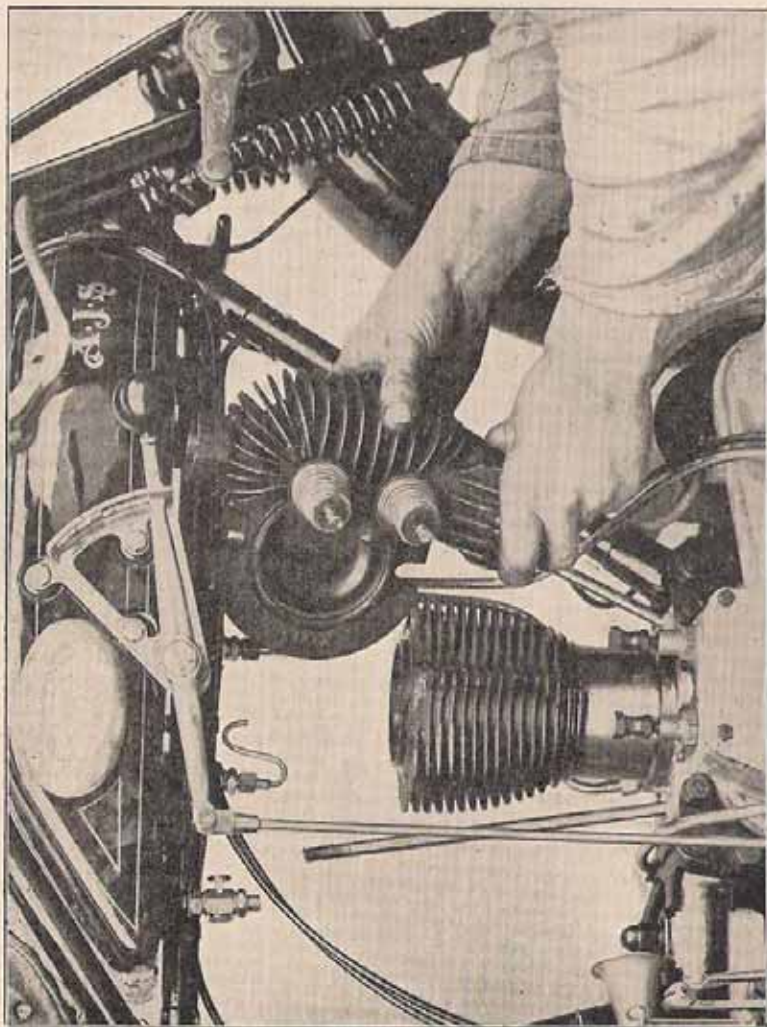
REMOVING CYLINDER HEAD OF THE S.V. ENGINE.
